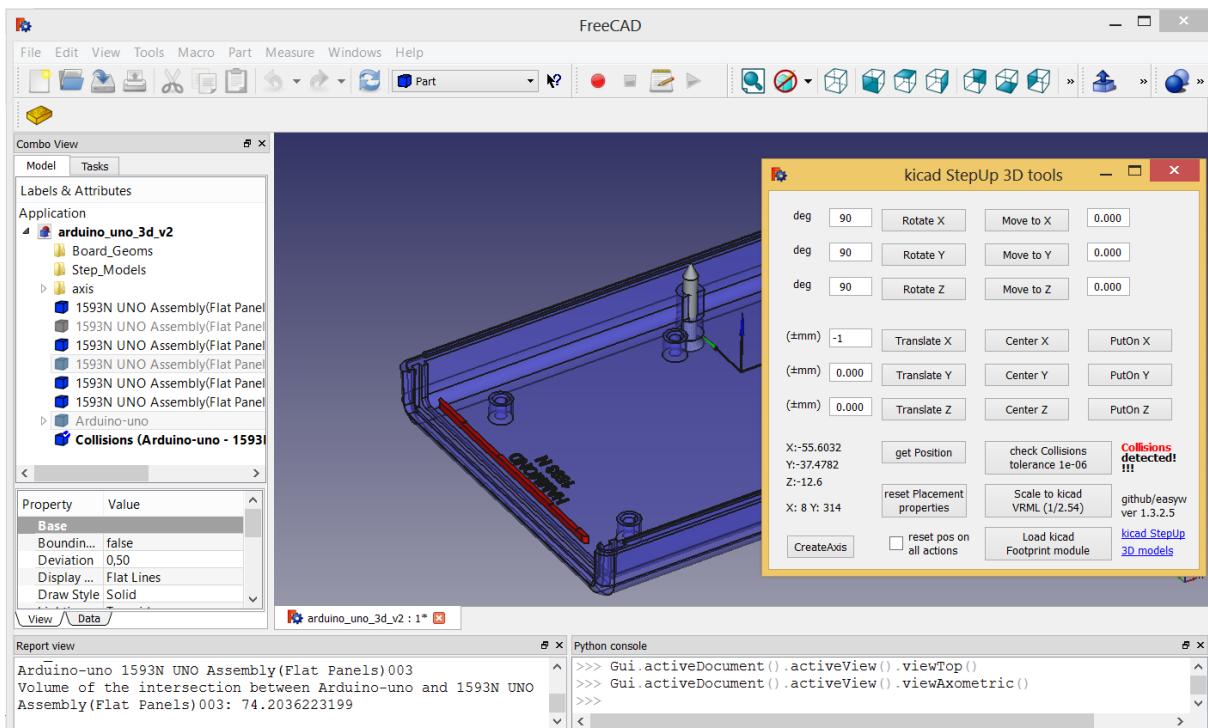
kicad StepUp tools: collisions found for 3D pcb and connectors with Arduino-uno-enclosure
